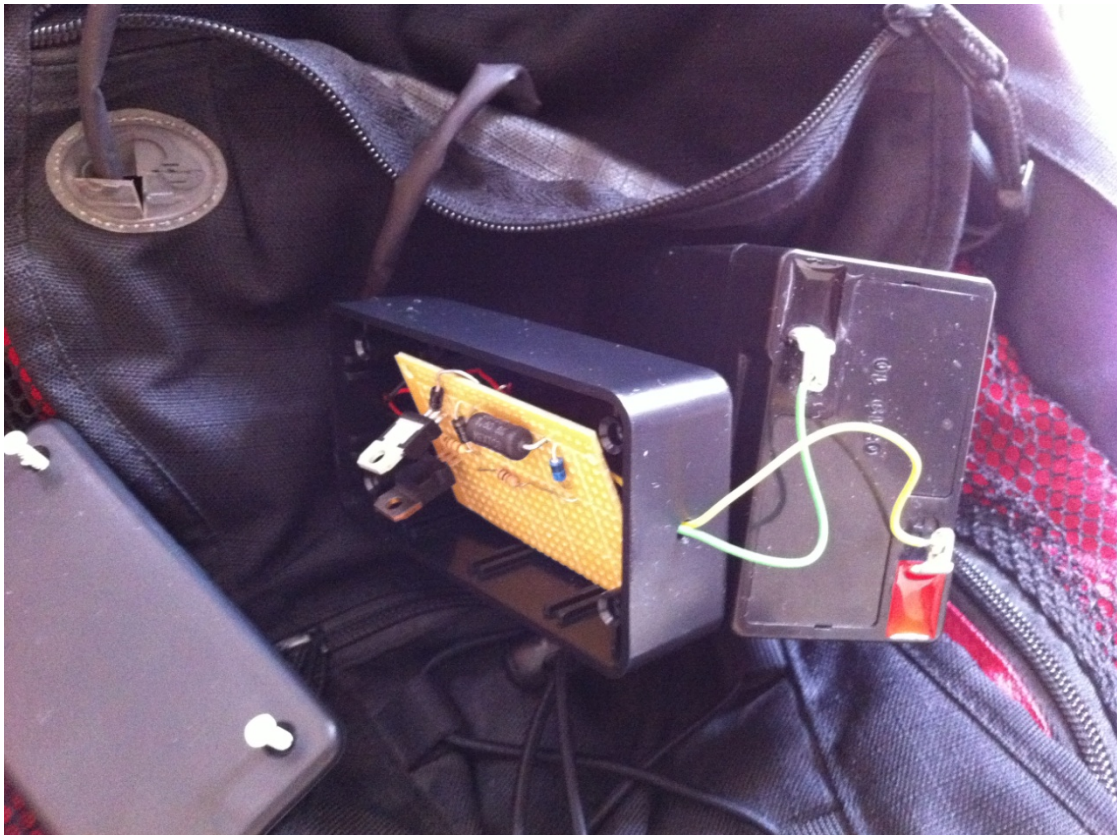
Soldered Electrical Components onto PC Board and Soldered to Battery
